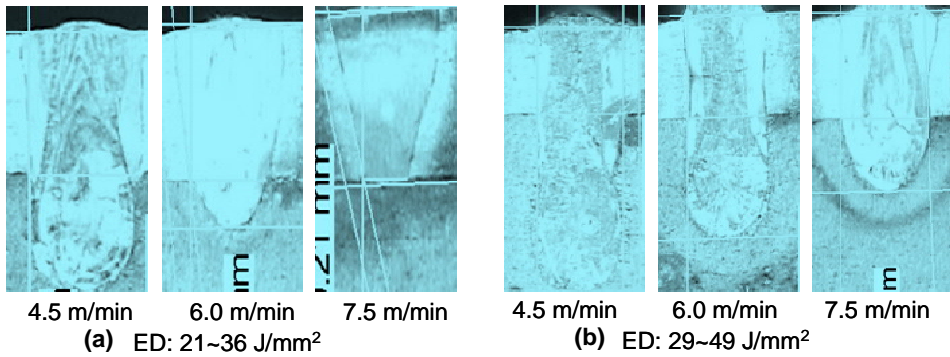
Composite photograph of keyhole profile at different welding speed and power
